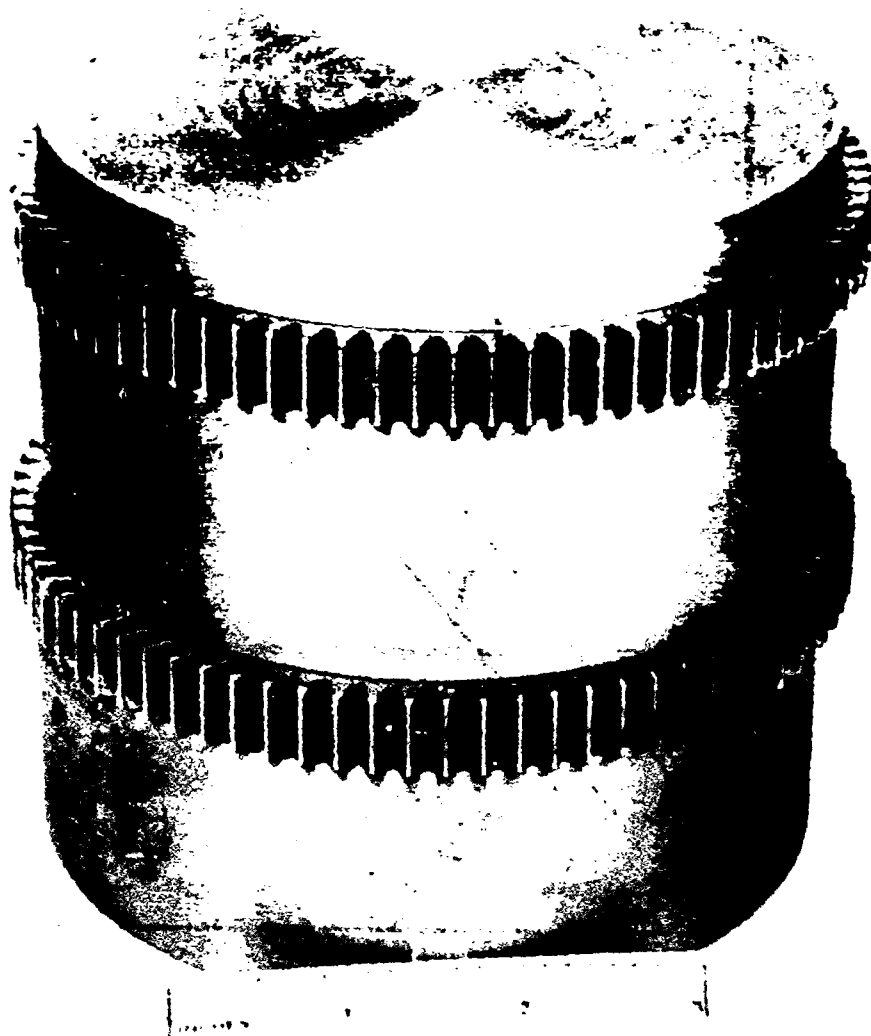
Assembled Mechanical Mask and Marine Drive Spur Gears Shown
